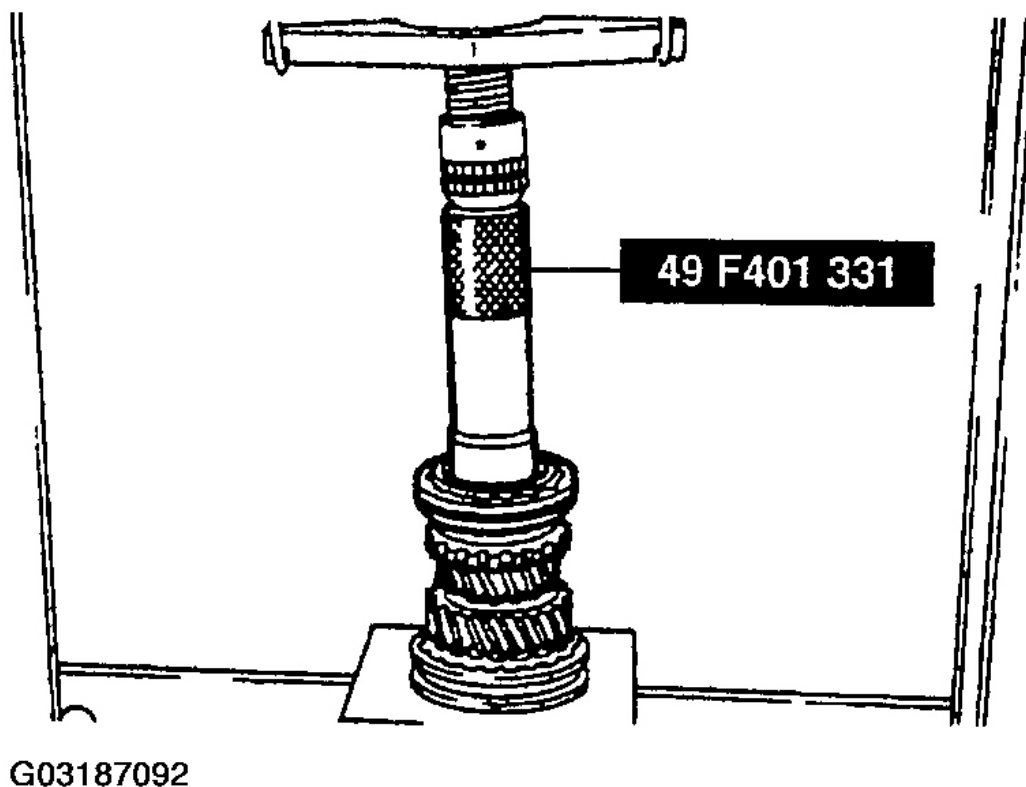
Installing 2nd Gear, 2nd Synchronizer, 1st/2nd Clutch Hub, 3rd Gear/Synchronizer Ring & 3rd/4th Clutch Hub
